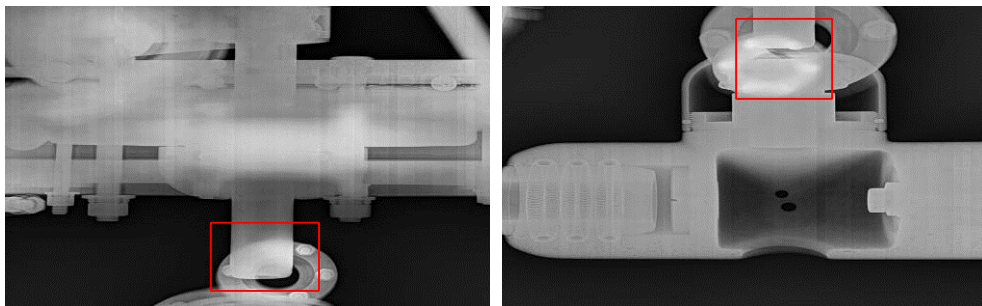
(a) sub-gate not in place of earthing switch; (b) closing not in place of earthing switch.
